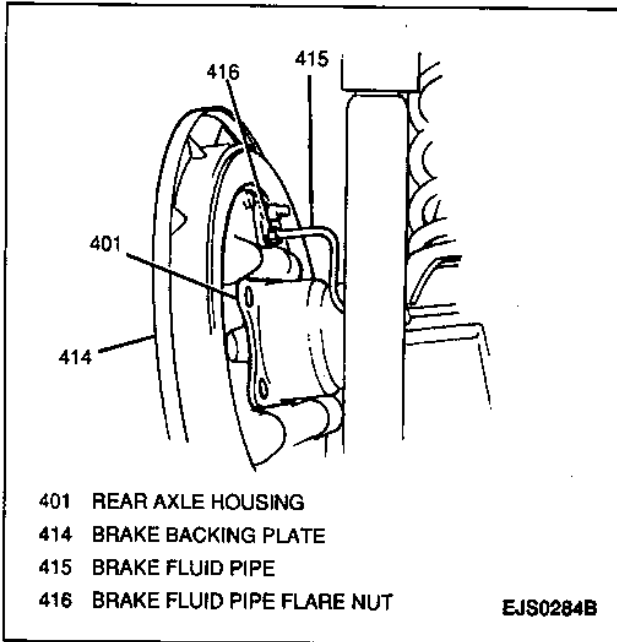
Rear Brake Fluid Pipe and Backing Plate
